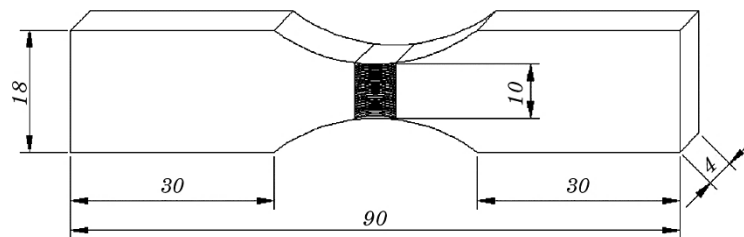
Shape and measurement of the fatigue test specimens [35].
